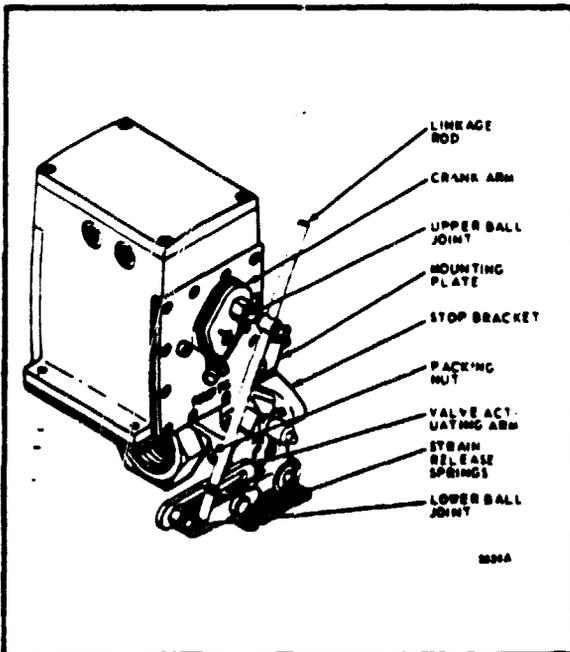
TYPICAL COMBINATION OF VS1E, MODUTROL MOTOR, AND Q100B LINKAGE ASSEMBLY.
